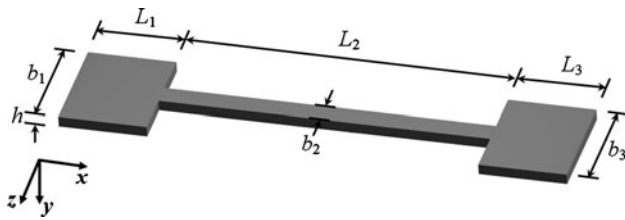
Schematic view of the geometrical parameters of a double clamped beam with three cross-sections
